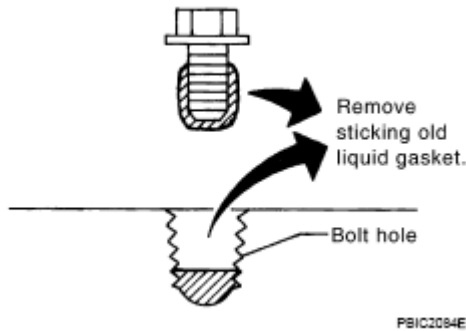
Identifying Old Liquid Gasket From Bolt Hole And Threads
